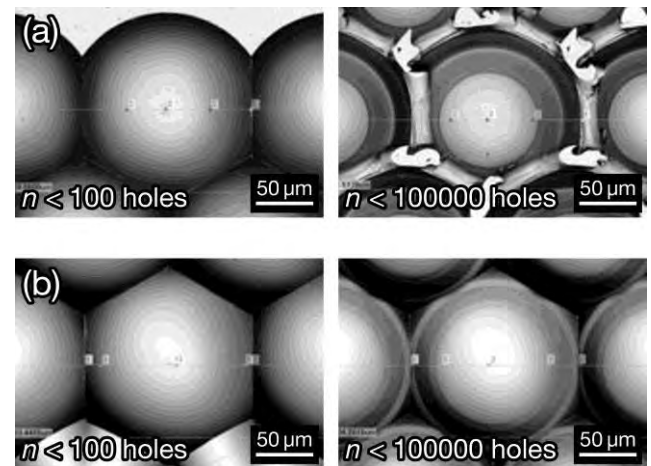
Shape of a microlens array machined under (a) conventional and (b) improved conditions, at the number of holes machined less than 100 and 100000 holes.
